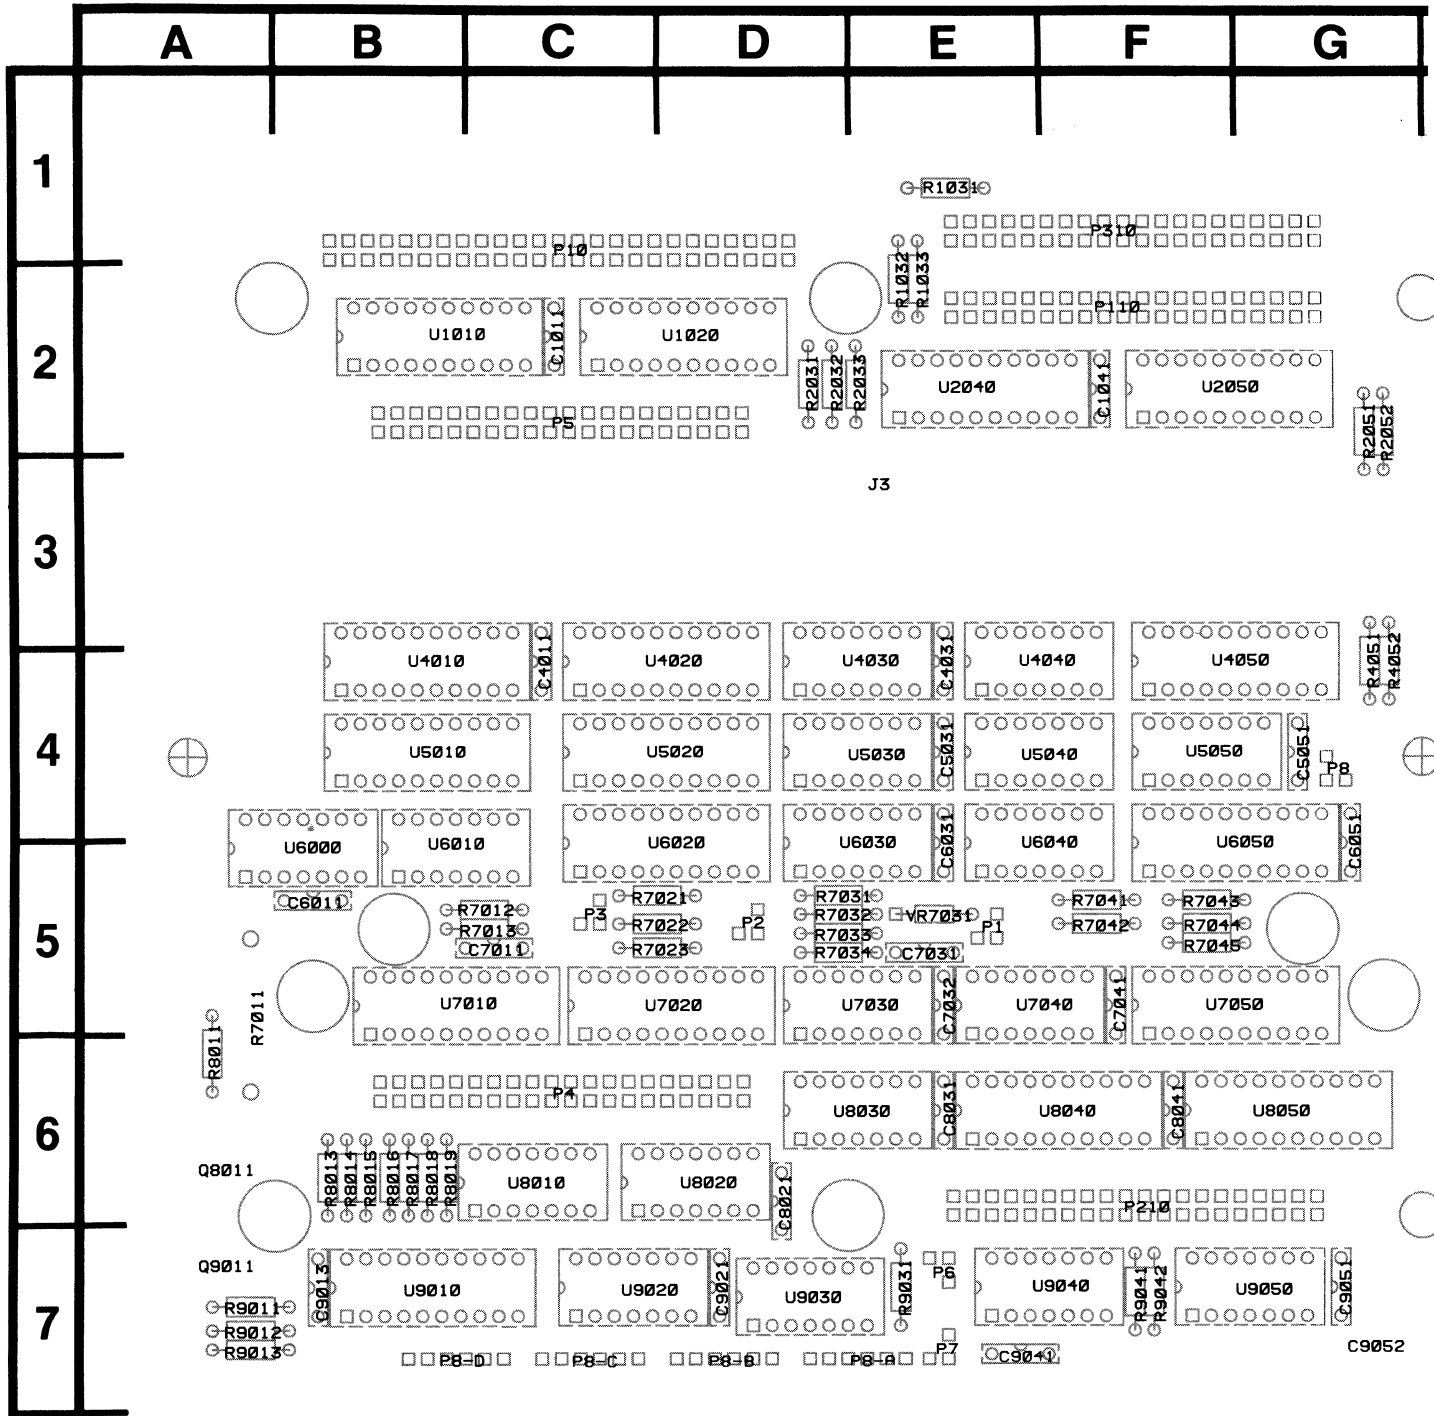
A20 68000 Cable Terminal Board Component Locations.
